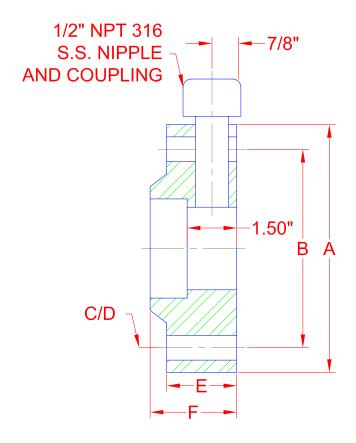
Flange, Filament-Wound 150 lb. Reducing Socket
